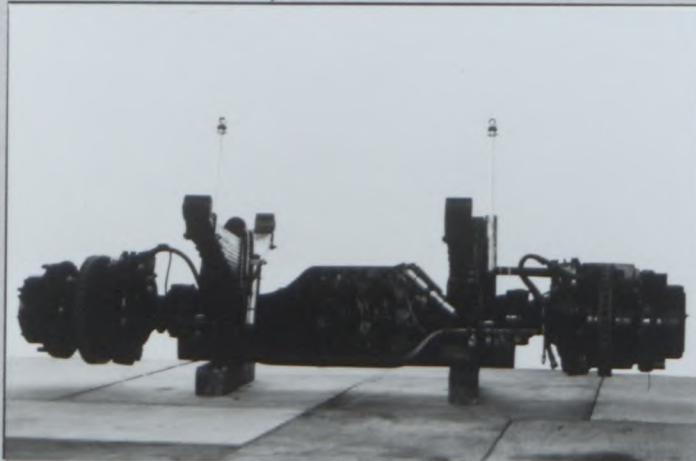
COMPLETE DISMOUNTED REAR 1 AXLE
